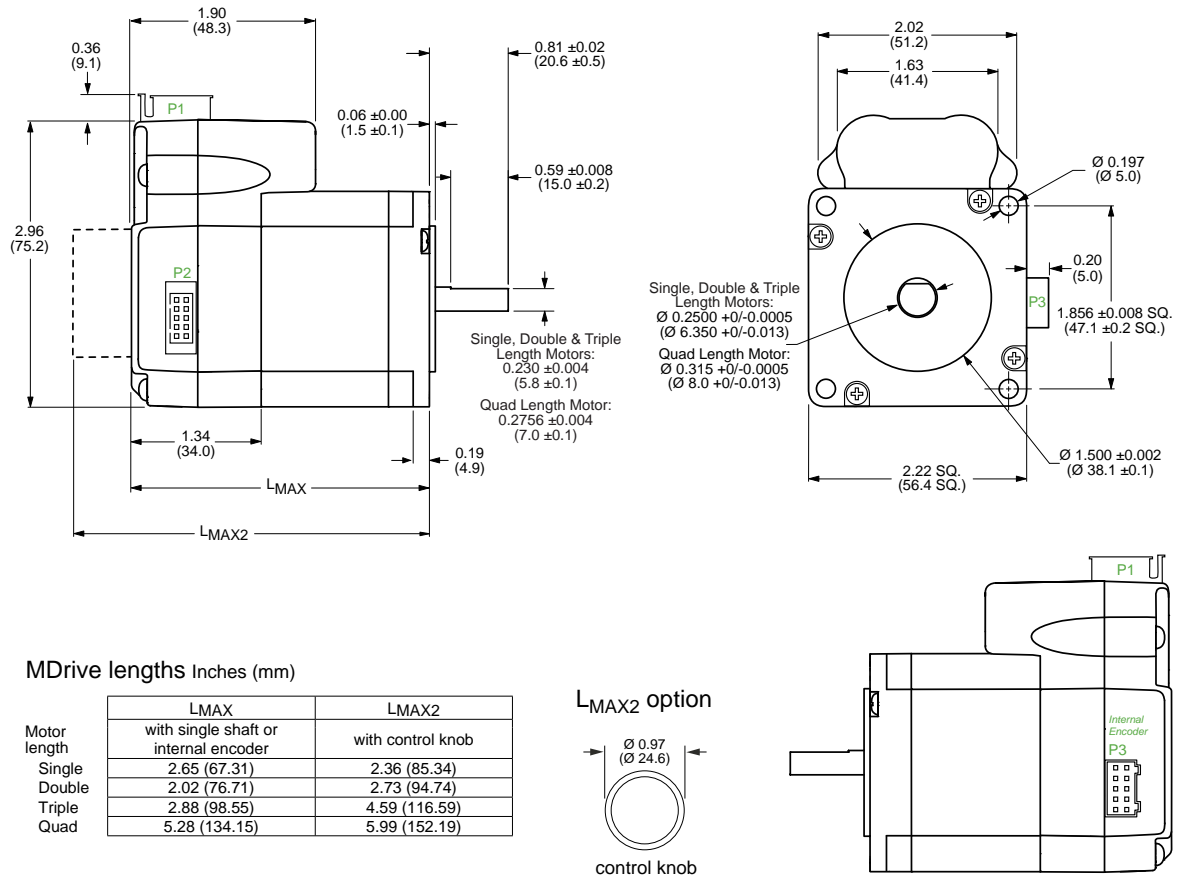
Mechanical specifications - dimensions in inches (mm)
